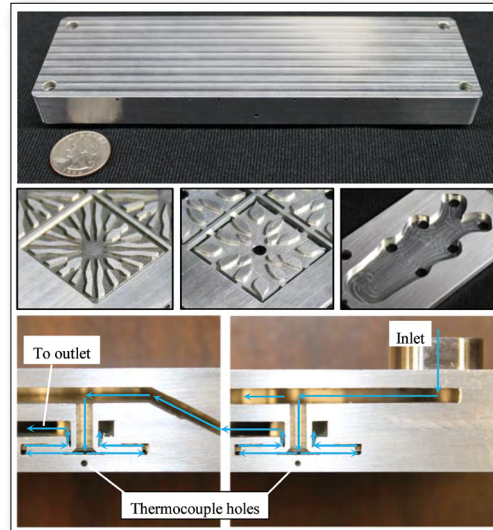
Fully assembled cold plate (upper image). Zoomed views of Layer 1 and Layer 2 microchannels plus manifold geometry (middle images from left to right, respectively). Zoomed cross section views of the inlet region with a single cooling cell (lower right image) and the middle transition region with a second cooling cell (lower left image). The blue arrows in the lower images indicate the coolant flow path. © [2014] IEEE. Reprinted, with permission, from [8]
